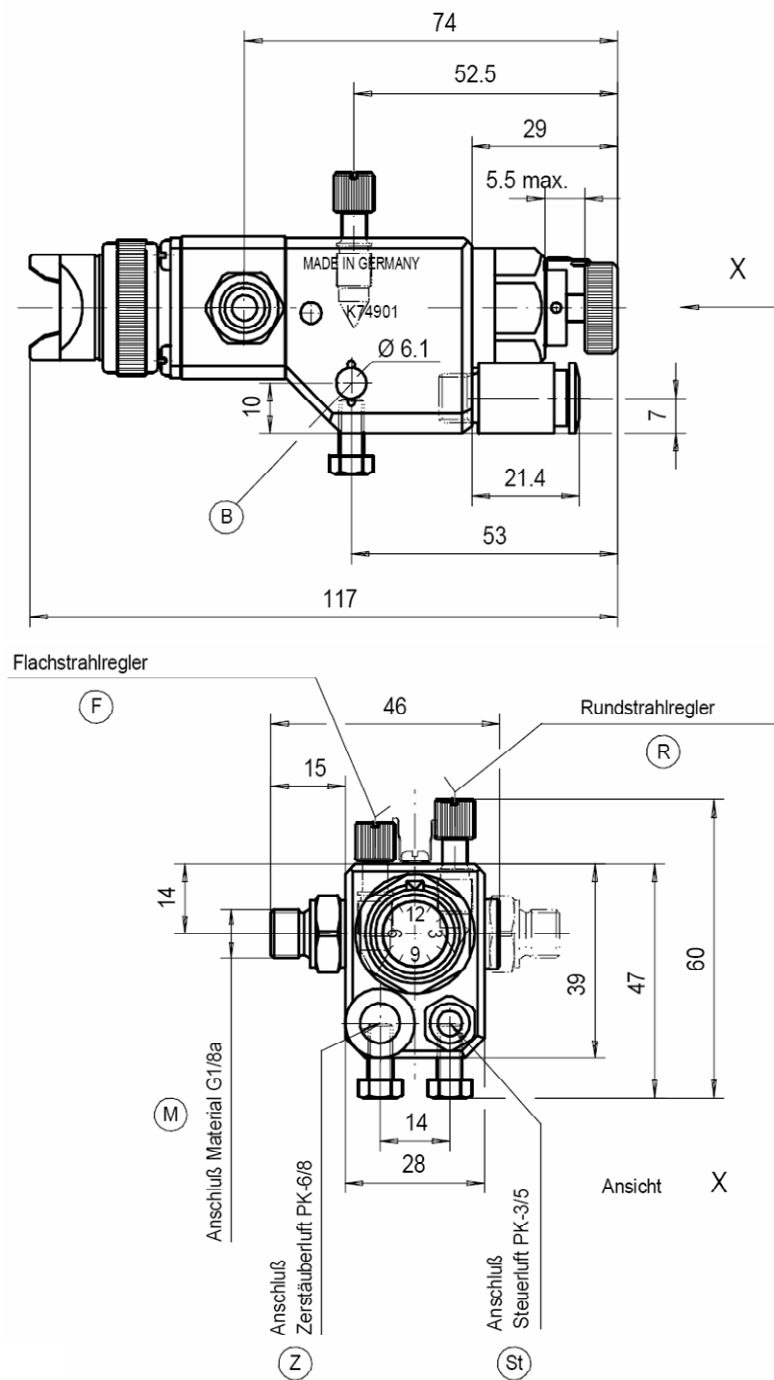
Dimensional drawing of the commercially available automatic air atomizing spray gun (M10, Krautzberger GmbH, Germany) utilized in our static spray deposition setup.
